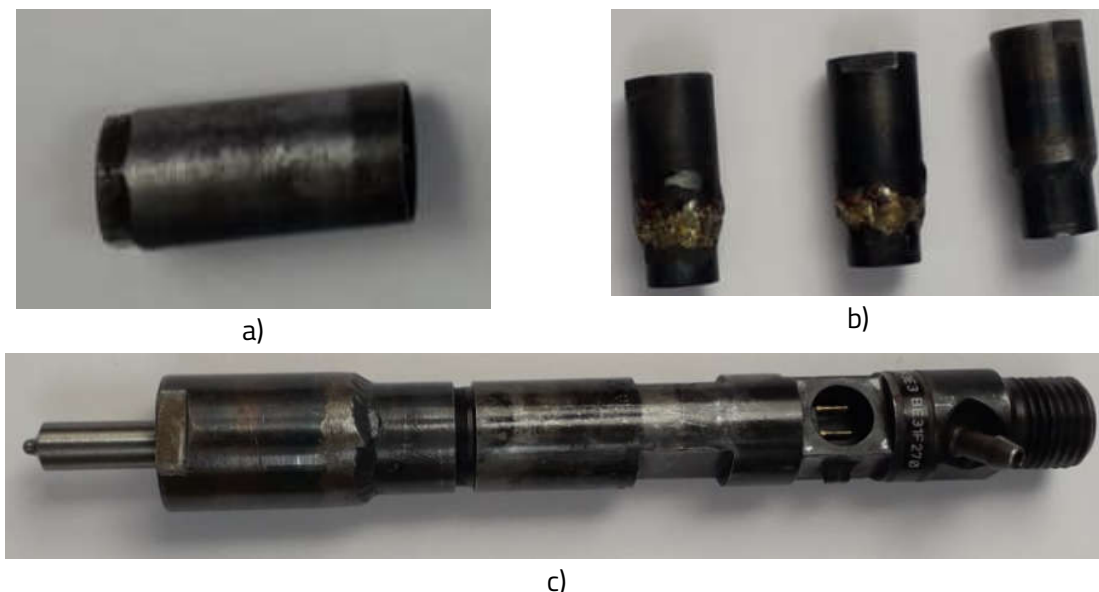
Delphi injector: a) Delphi nut; b) manufactured nut; c) assembled Delphi injector
